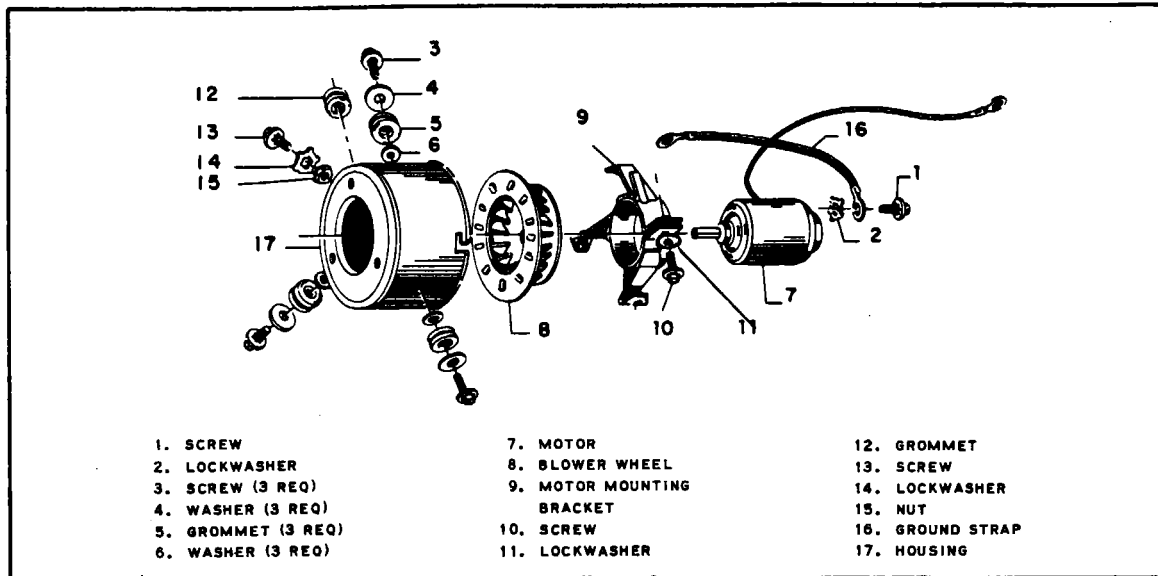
Exploded Parts View, Ventilating Air Blower Assembly
